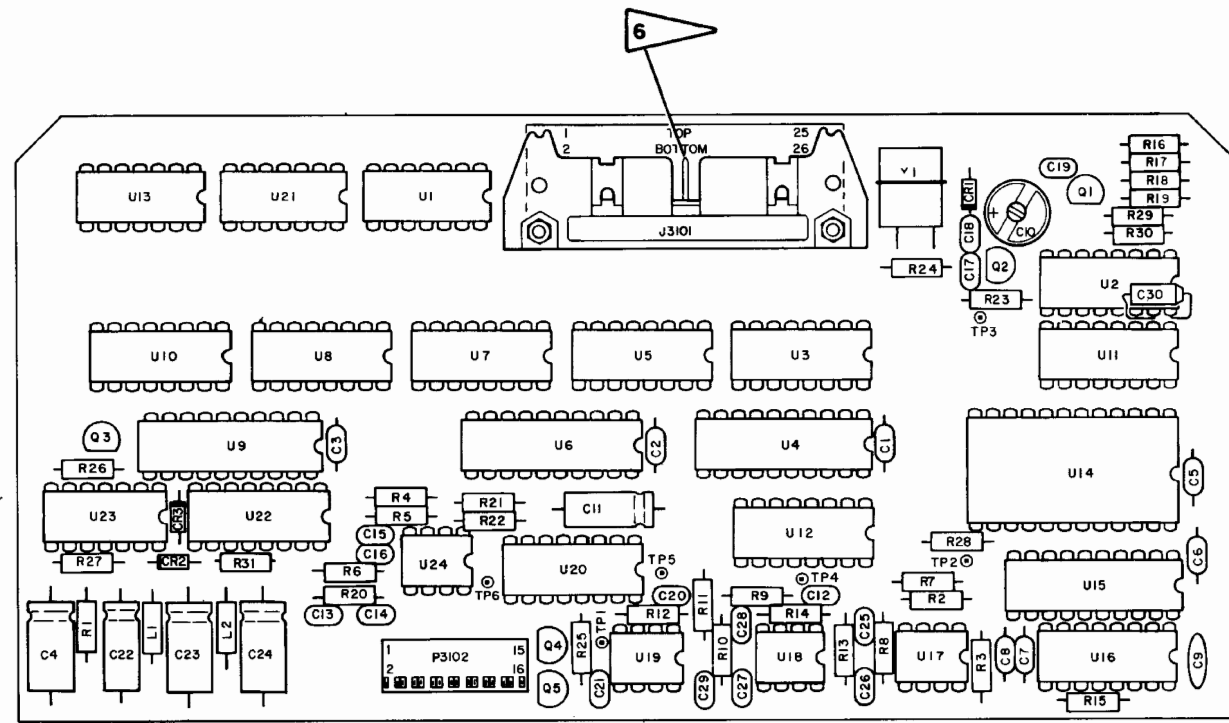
Frequency Standard PC Board Assembly (0000-5111-700-E4)
